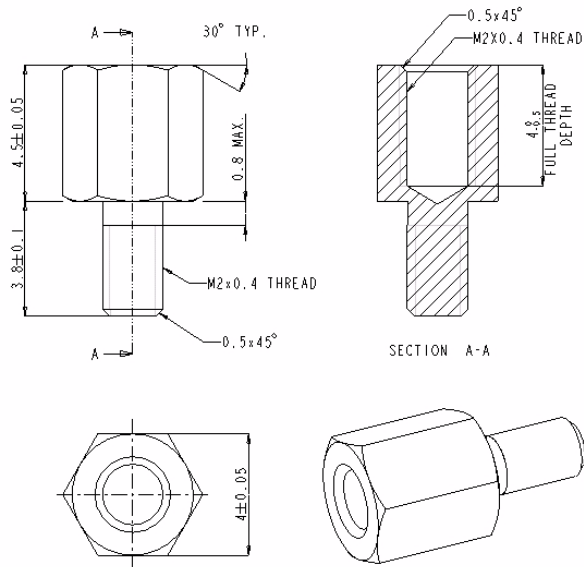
W24 + G24 Stacked Mounting Spacer Dimensions
